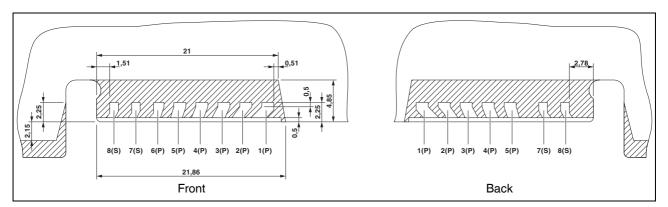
Detailed dimensional drawing of TBUS8-18,8-PPPPPSS contact pads
